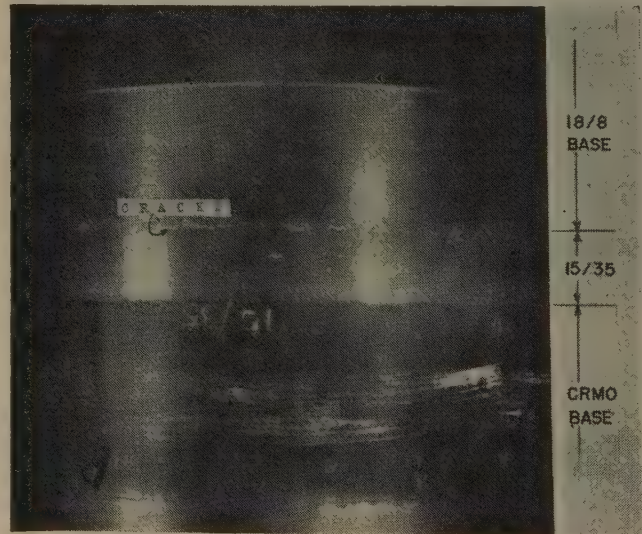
ZYGO EXAMINATION OF 15/35 WELD
